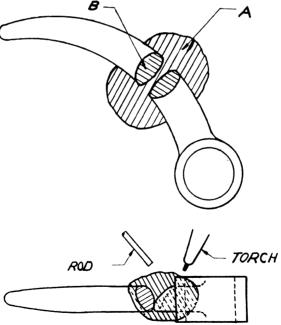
Preparing a die casting for welding: B. Ground casting fracture,
